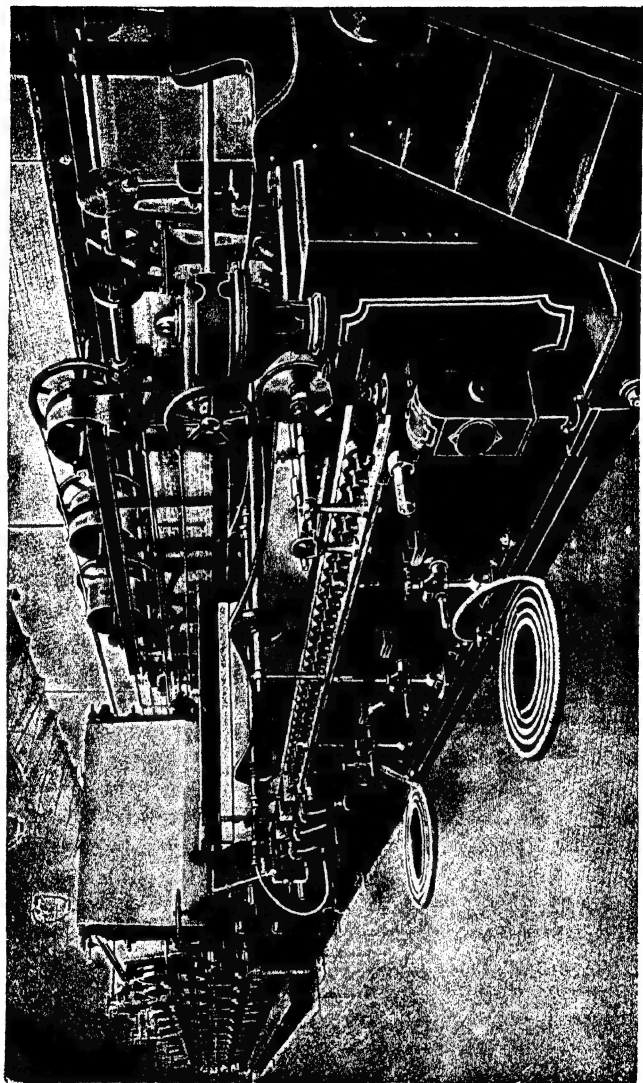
FOURDRINIER PAPER-MAKING MACHINE
